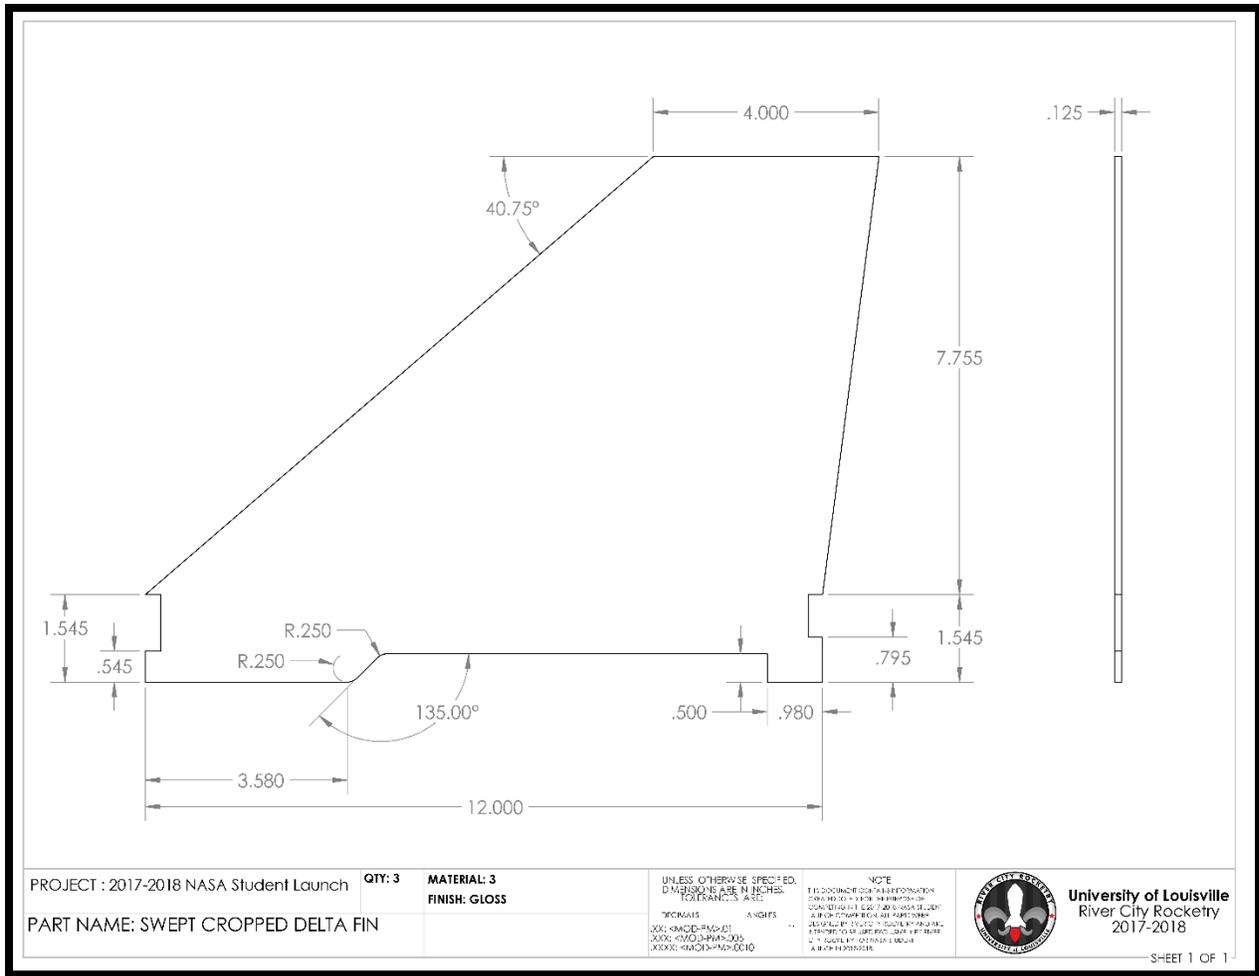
Dimensional drawing of the launch vehicle's fin design.
